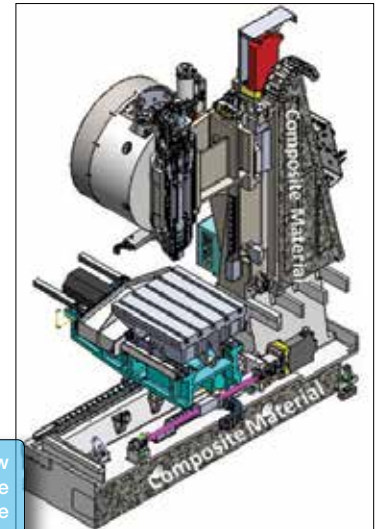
A cross-sectional view of the iCTech composite technology enabled machine
